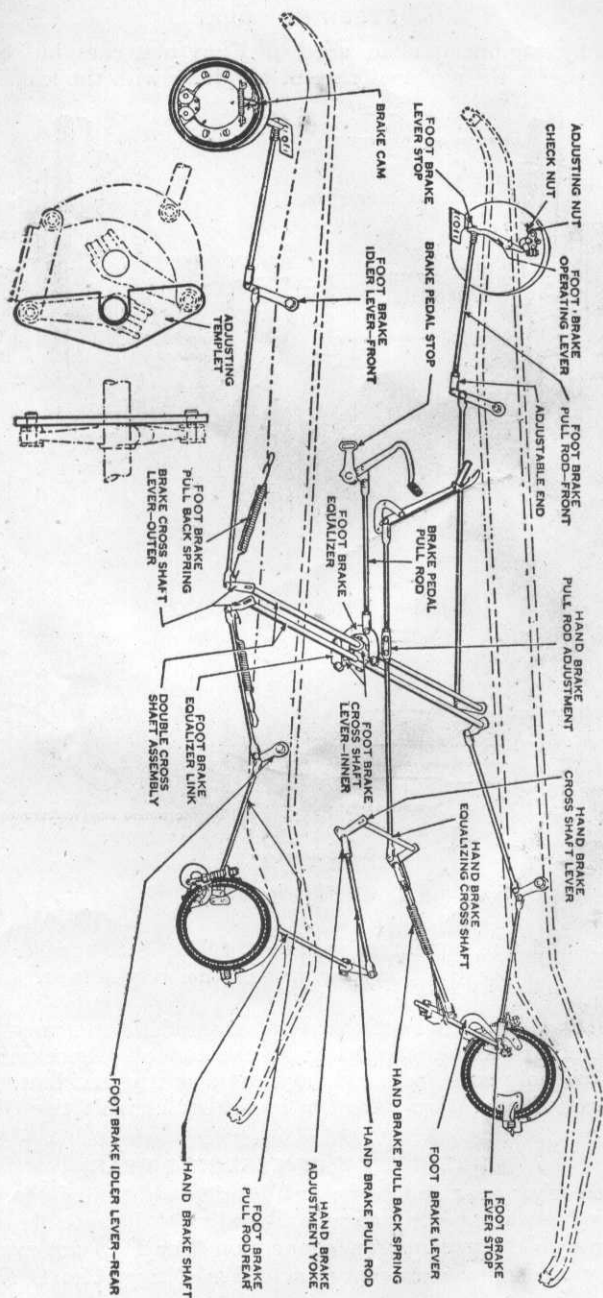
Brake Rods and Levers—10 cwt. Chassis.
